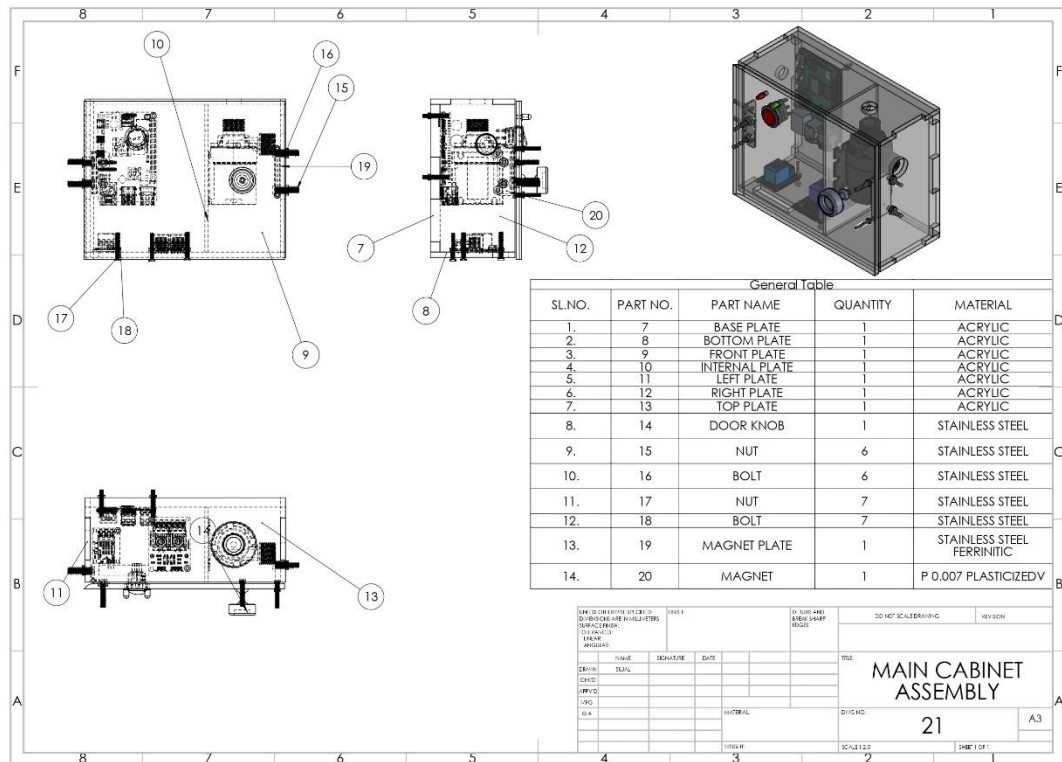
Drafting of Assembly of Main Cabinet
